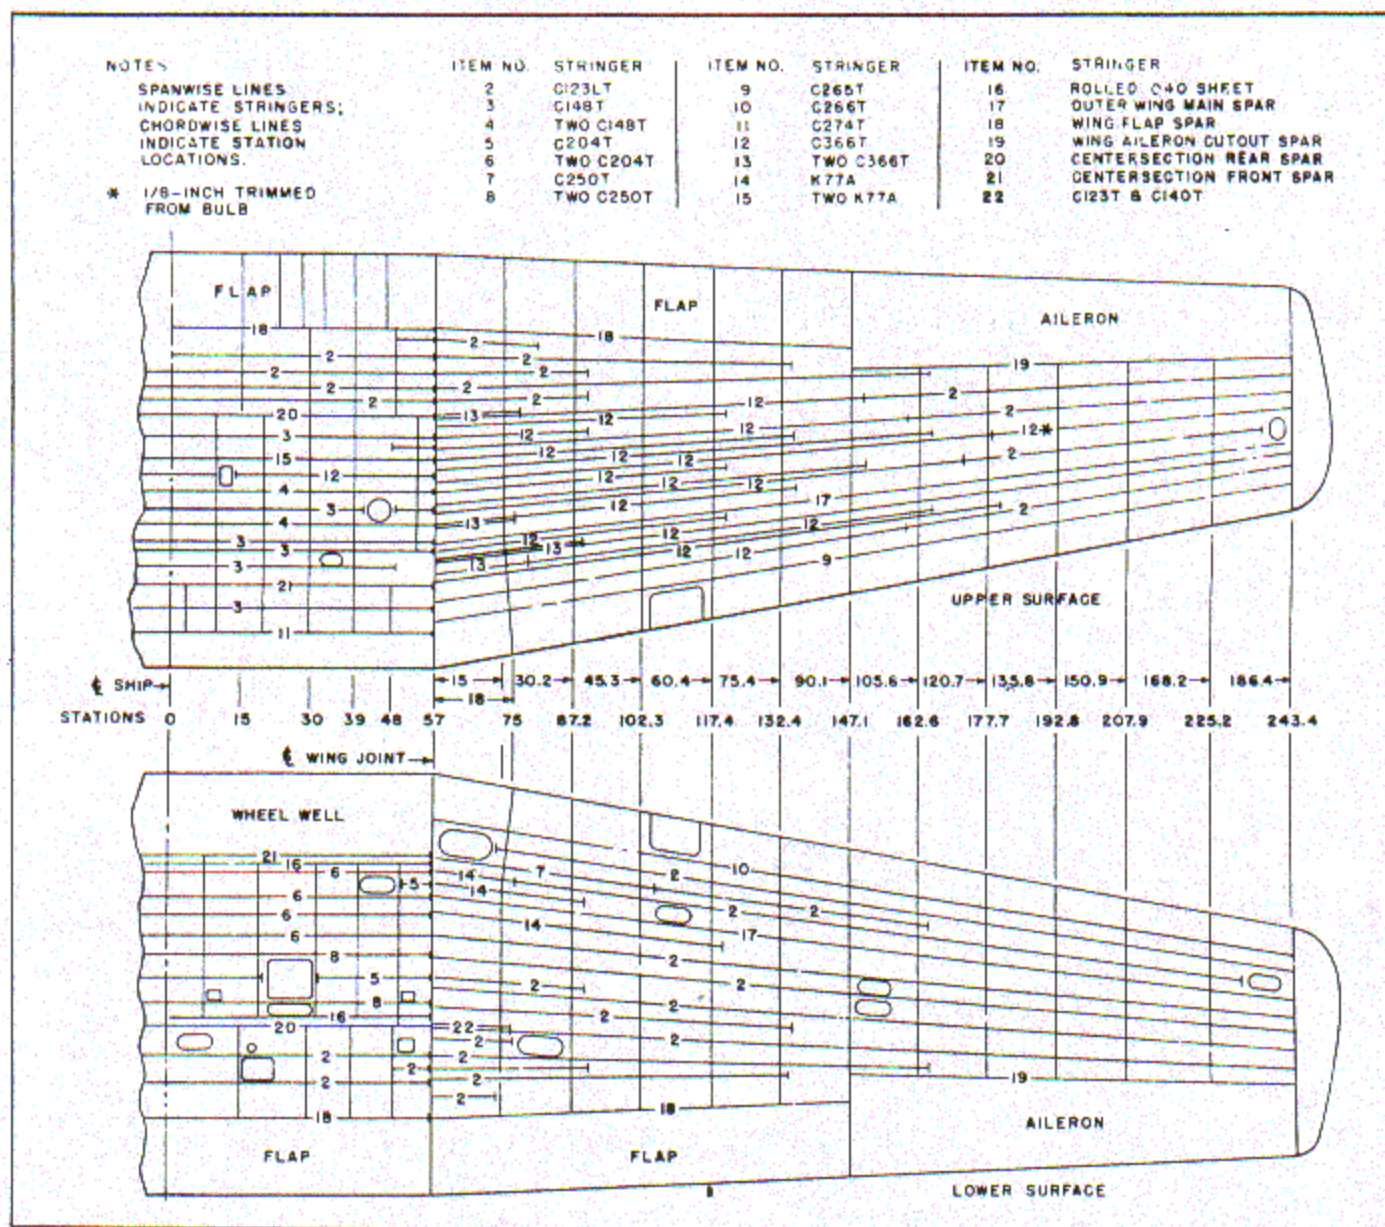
Wing Stringer Arrangement and Stations—AT-6A
